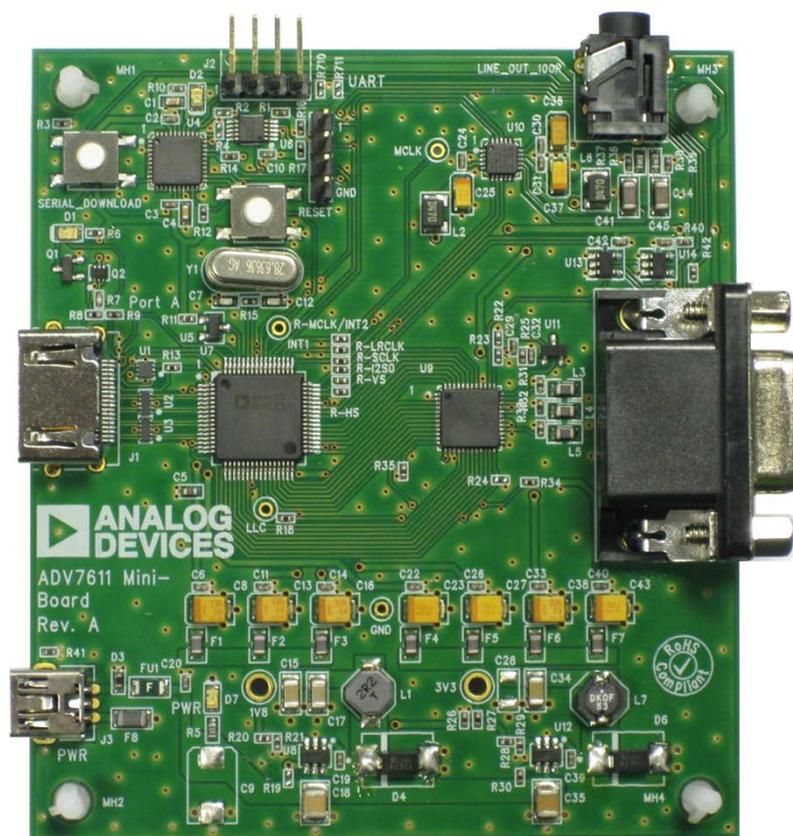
HDMI-to-VGA (HDMI2VGA) Converter with Audio Extraction, 2-Layer PCB
